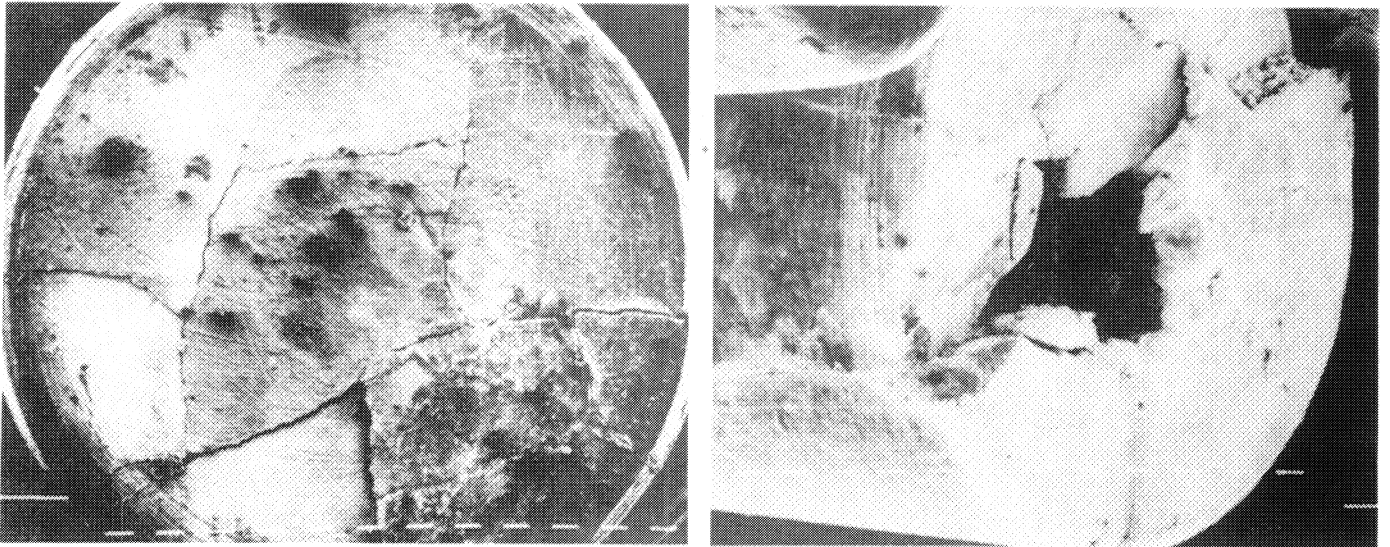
Front view of the W-rods after irradiation. The longitudinal cracks and a pit of about 1 mm depth can clearly be seen.
